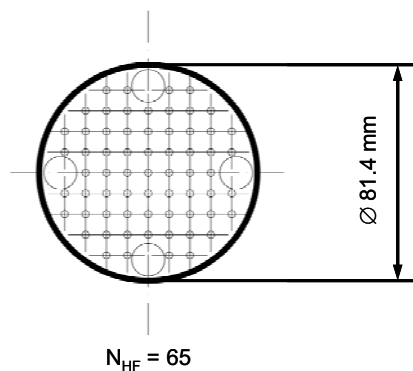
Pressure loss test cell: Technical drawing of a fibre plate for a packing containing 65 not-moving hollow-fibres.
